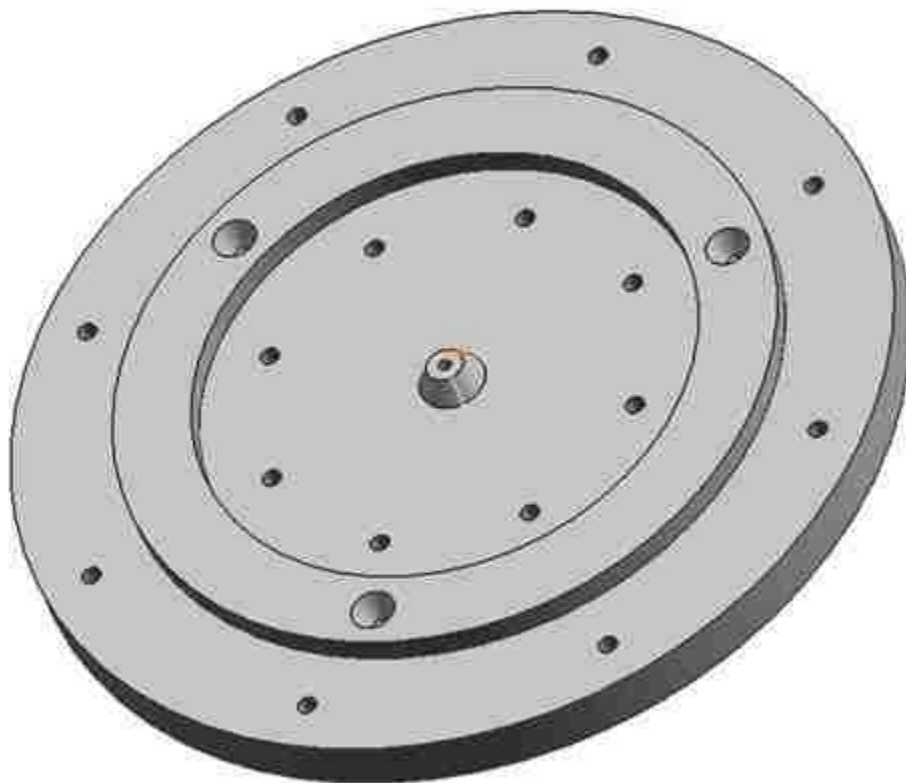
Isometric View of MRS SAT Shaker Mounting Fixture
